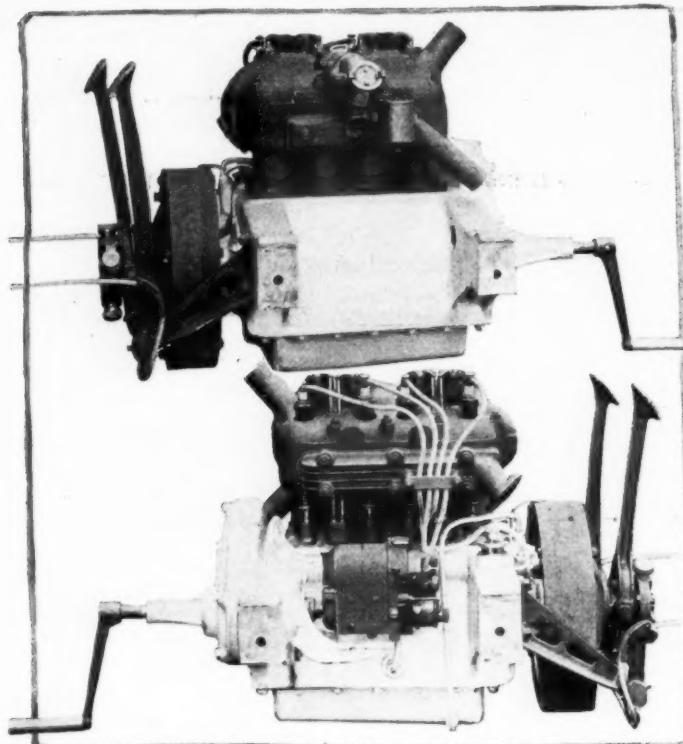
Two views of motor on Wolseley Stellite car cylinders 27.16 x 31.2. Note detachable cylinder heads with one set of valves in same. Further note bracket for supporting control pedals
